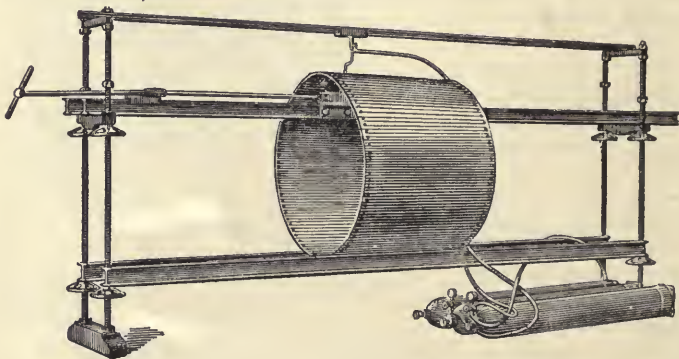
Machine for welding cylindrical tanks, etc., made by the *Société l'Oxydrique*.
